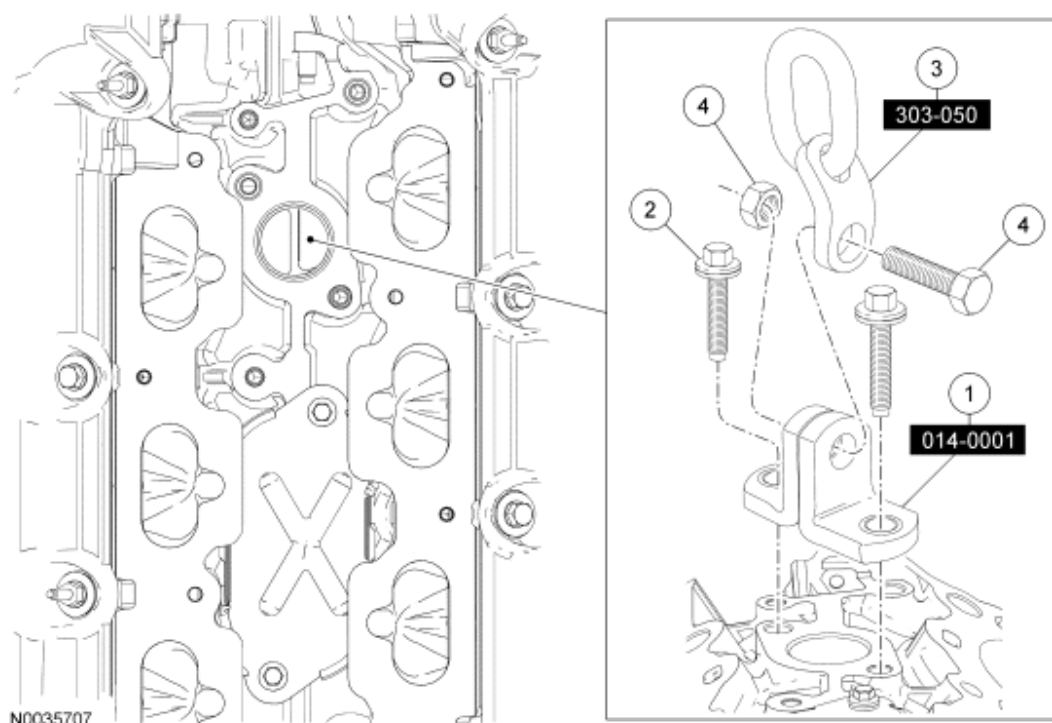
Identifying Special Tools (303-050 And 014-0001)
